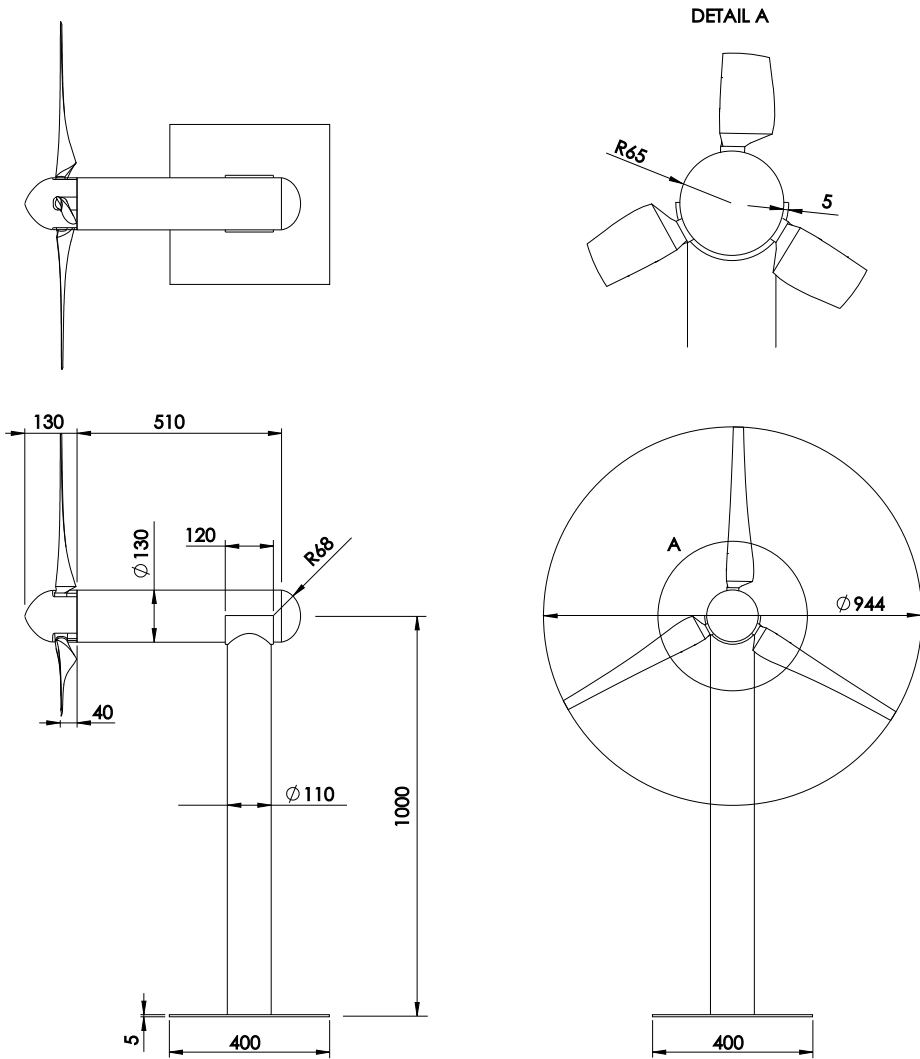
Technical drawing of NTNU model wind turbine T1.
